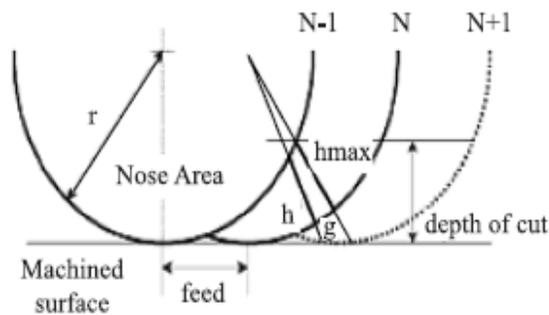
Tool nose area showing uncut chip thickness (h) and the distance (g) from the cutting edge to the final machined surface
